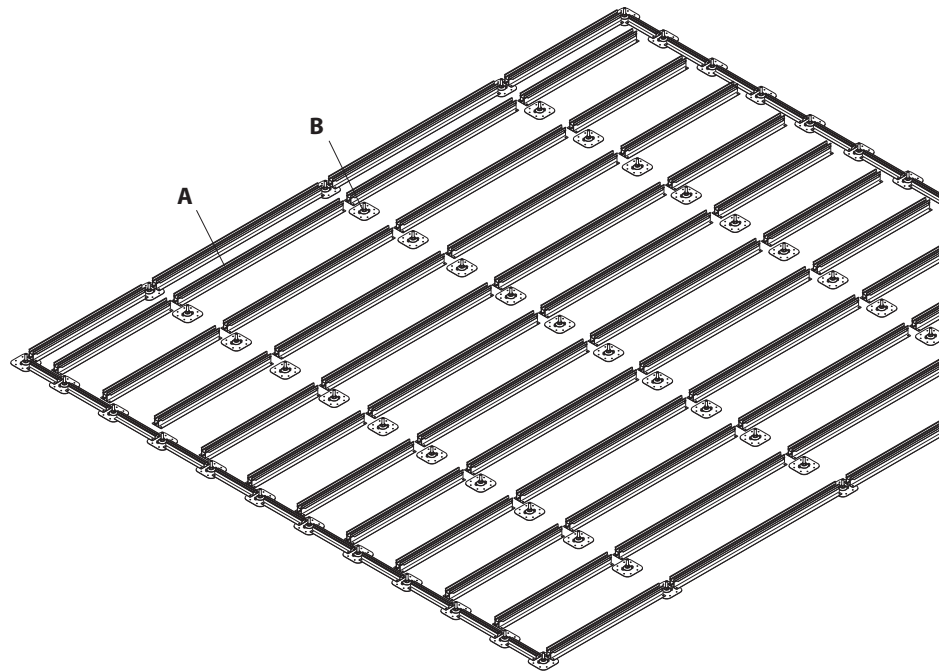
LAYOUT OF LONG CROSS-BEAMS
